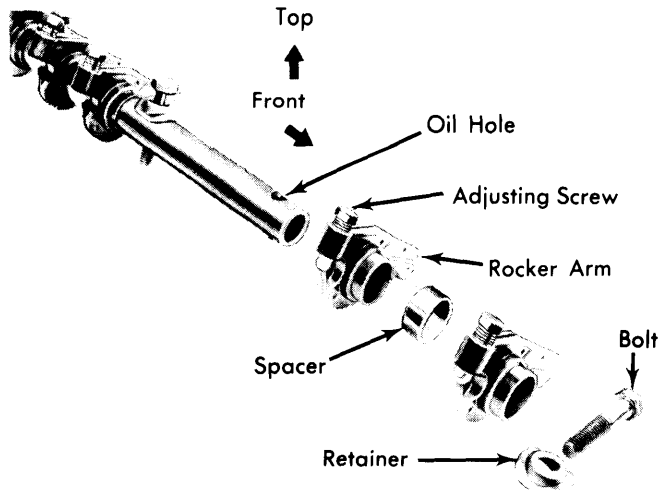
Exploded View of Portion of Rocker Arm Shaft Assembly
